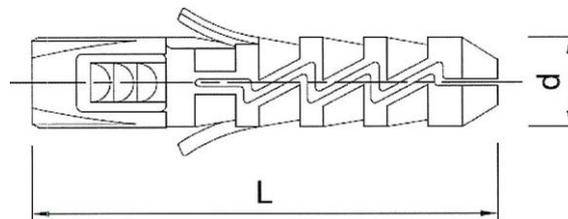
Components of FIX plastic-metal expansion anchors (with a hexagon head screw)
